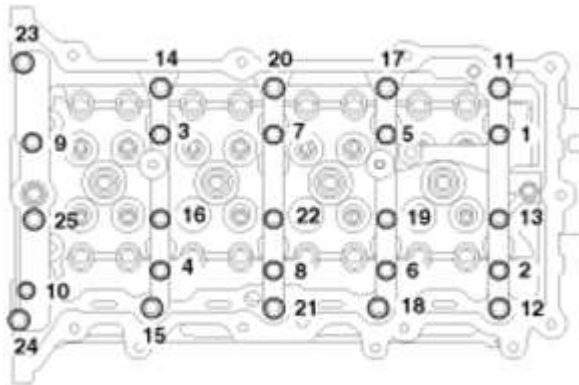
Camshaft Bearing Cap Bolt Loosening Sequence
